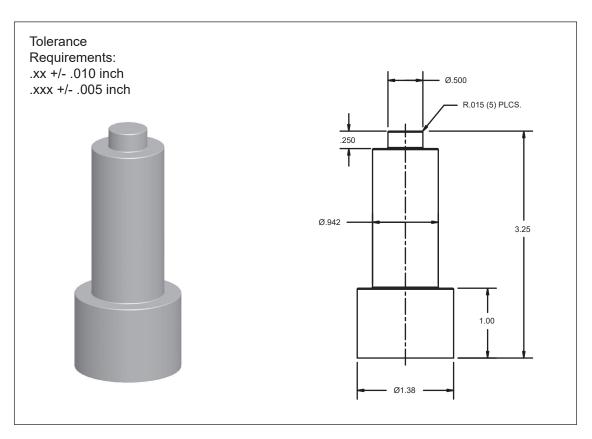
Dimensions for Tool P/N 101F-0002 Seal Installation and Removal Tool
